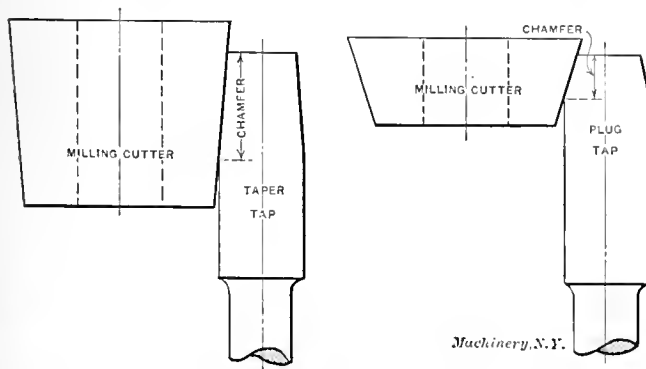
Principle employed in Tap Chamfering and Relieving Machines.
